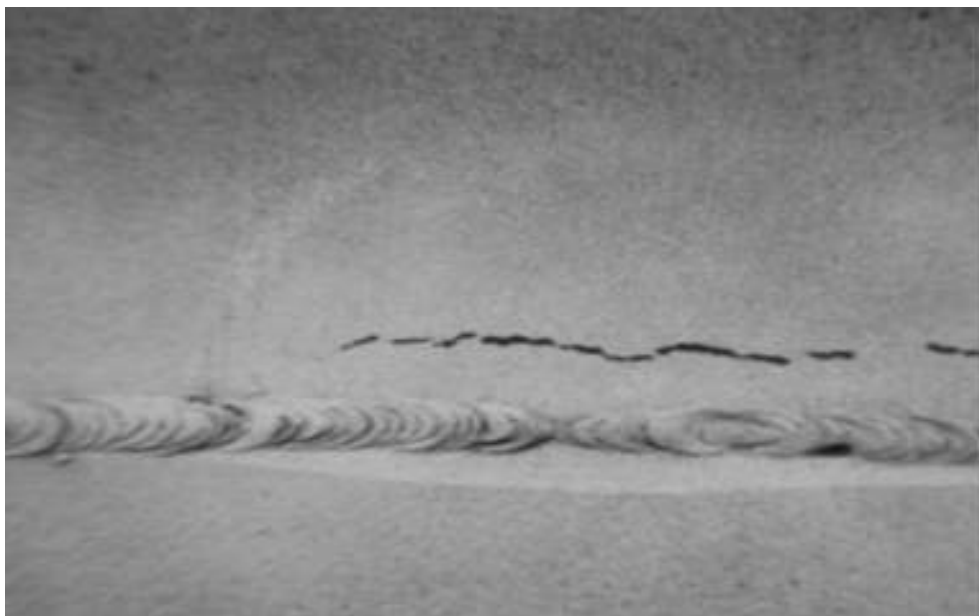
Carbonate cracking adjacent to a weld. (Reference 6)
